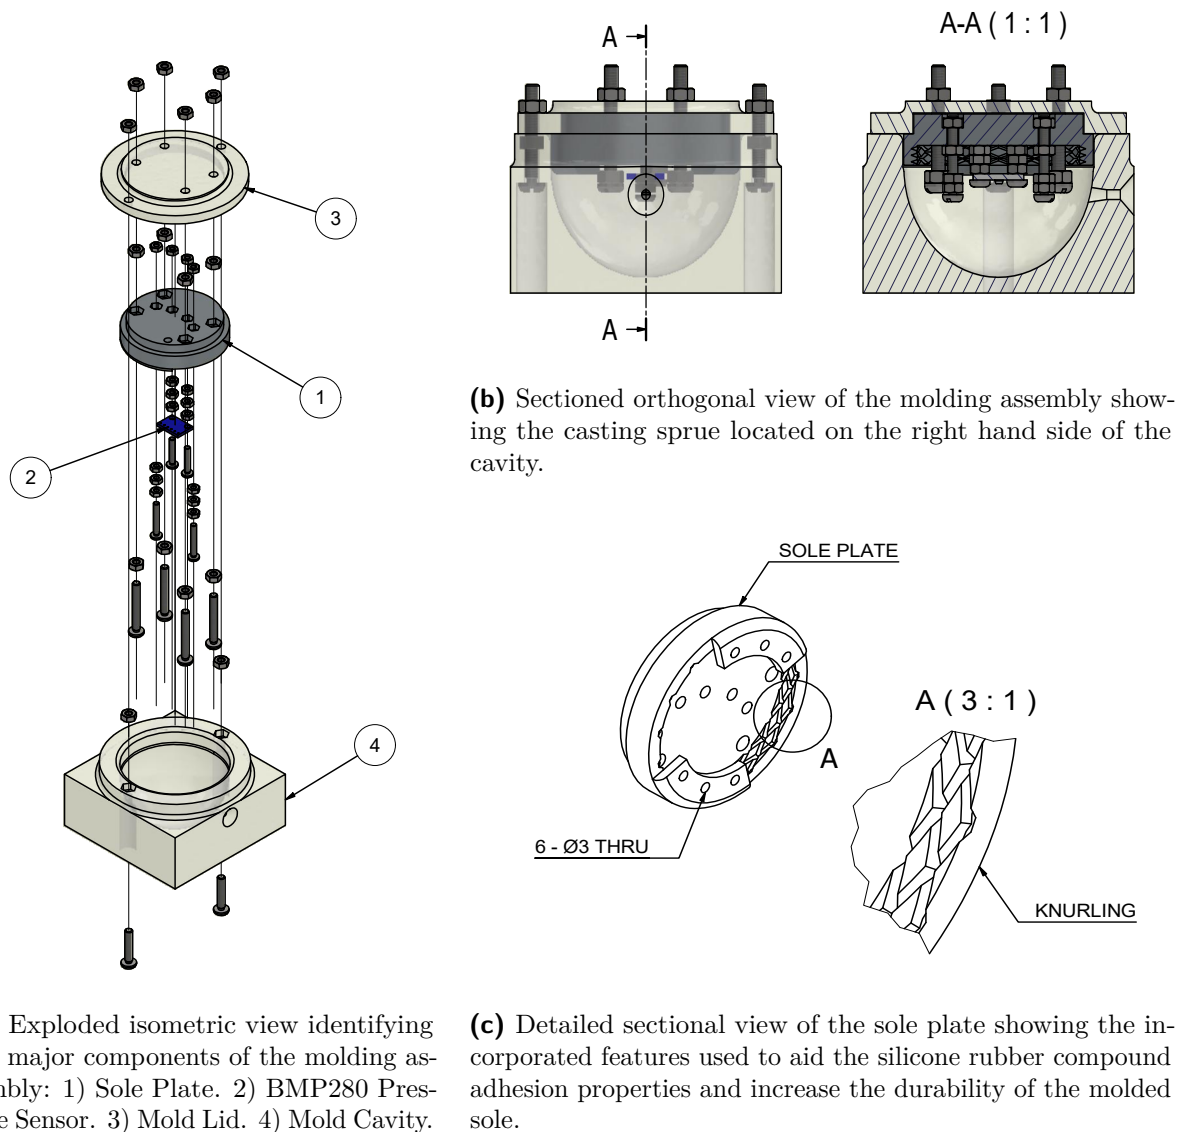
Inventor renderings of the molding assembly and detailed foot sole features.
